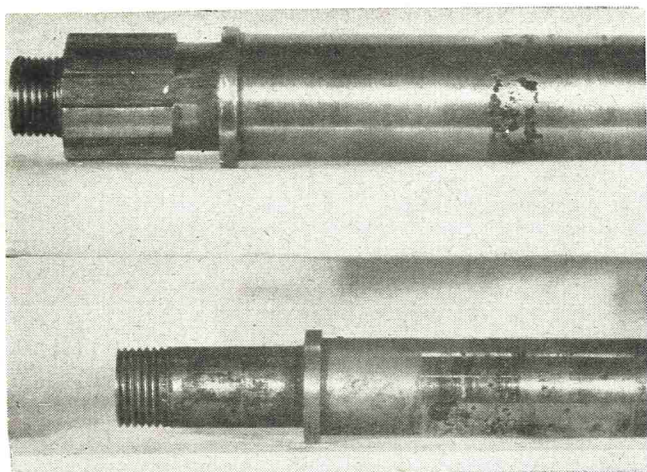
Better design of packing glands and stuffing boxes, as well as pump and shaft arrangements on mixing apparatus, have reduced the frequency of corrosion problems such as those shown here on shafts from earlier machines. Periodical check and replacement of packing materials is advised.
